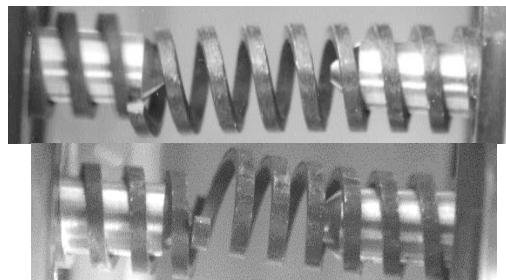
Two irradiated specimens after fracture during torsion fatigue test
